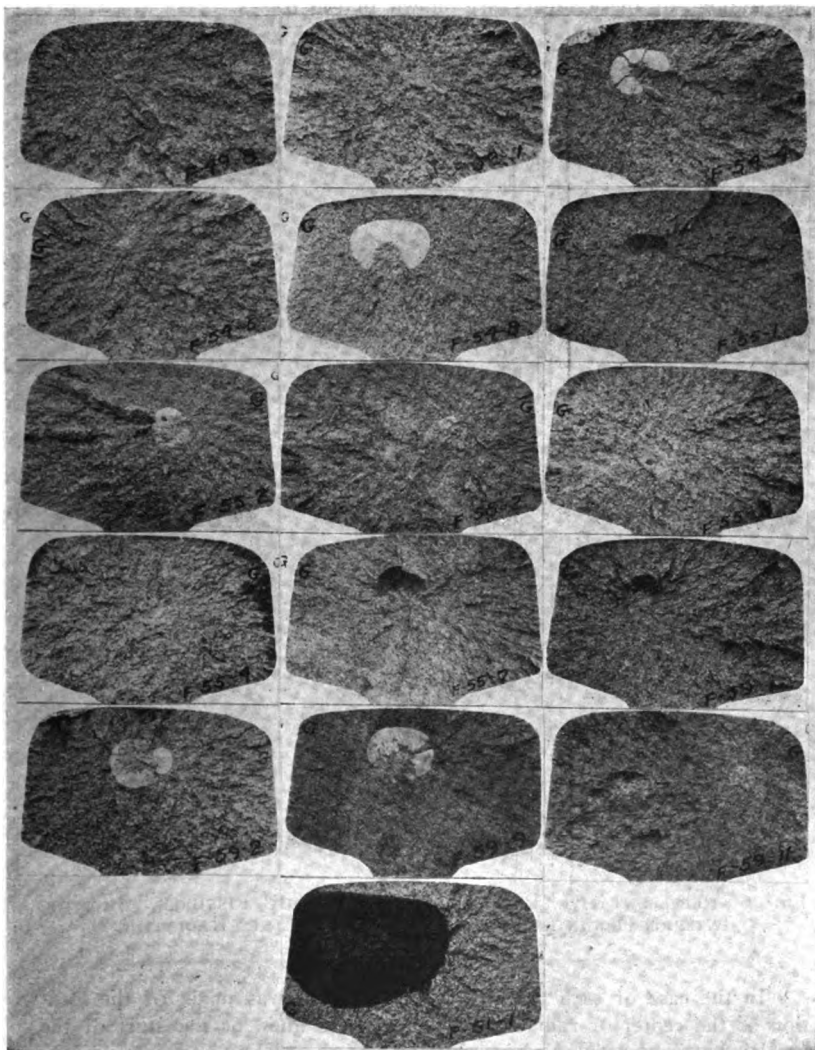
FISSURES FOUND IN DROP TEST IN F RAILS.
